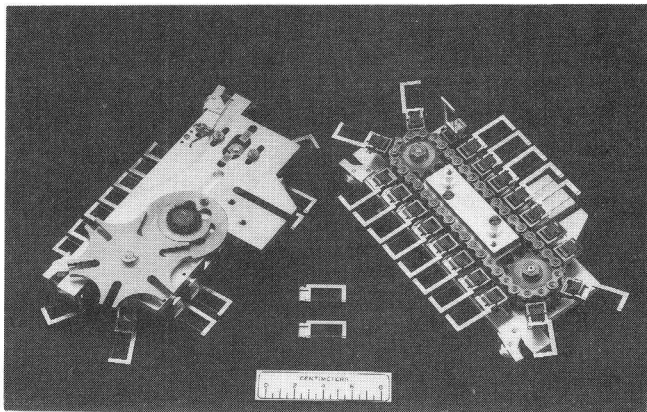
Front and back view of the foil carrier. In the front view (right) the beam shield has been removed.
